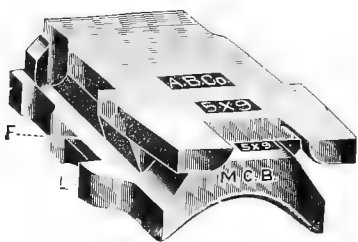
A. B. C. Wedge Fitted to M. C. B. Journal Bearing.
